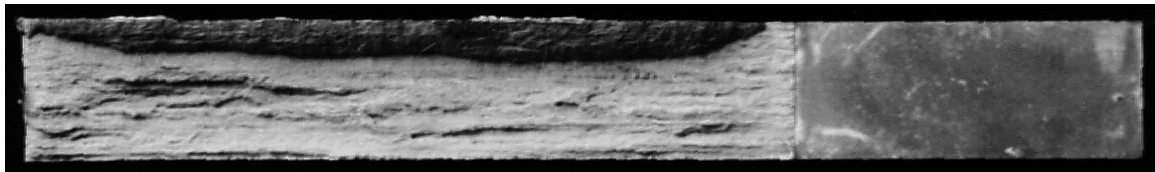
Fracture surface of 6Al-4V Ti specimen loaded dynamically.
